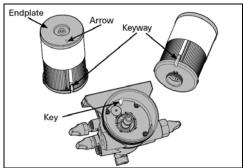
KEYWAY ON FUEL PRO 386 FILTER
